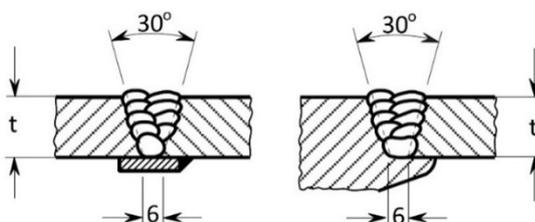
Single-side welds with permanent weld pool support (backings)
